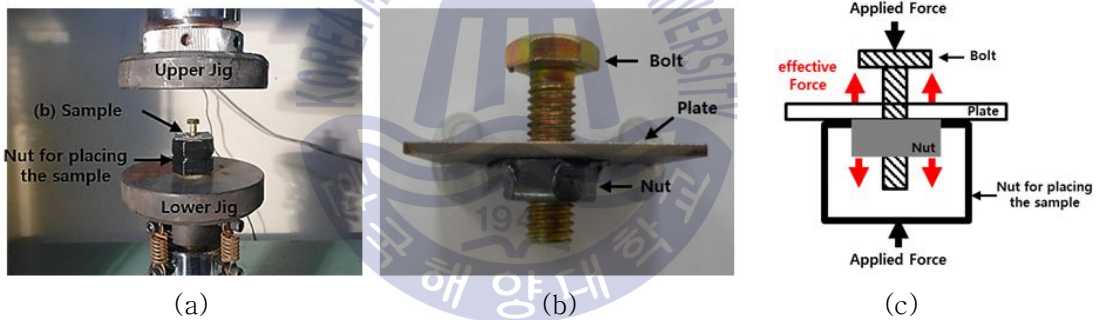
Pull-out load test, (a) Fixture for pull-out testing
